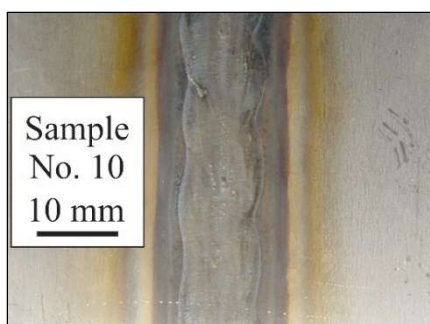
Specimen N° 10 - TAG, 210 A, filler wire 120 cm/min
